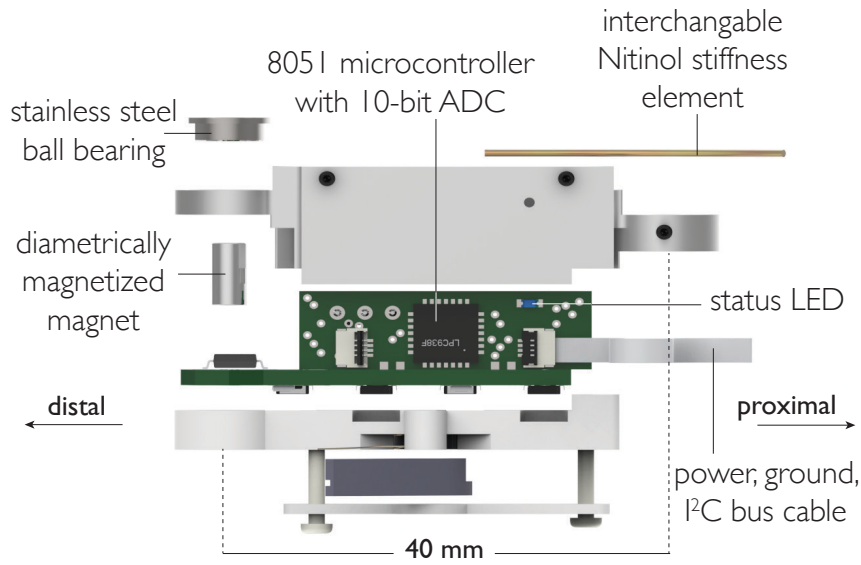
Exploded CAD rendering of a single segment (bottom view).
